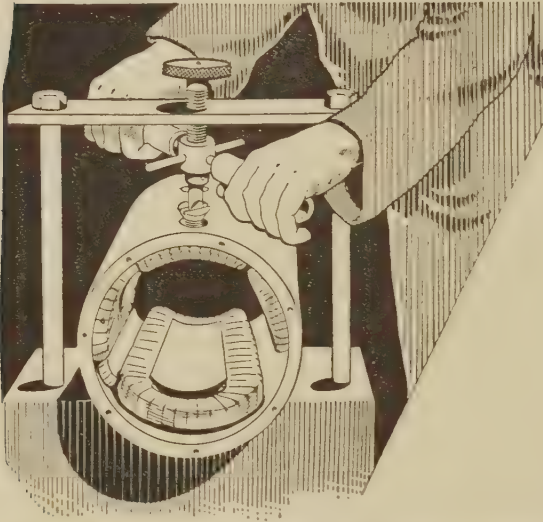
A Device for Unscrewing C.A.V. Pole-piece Screws.
